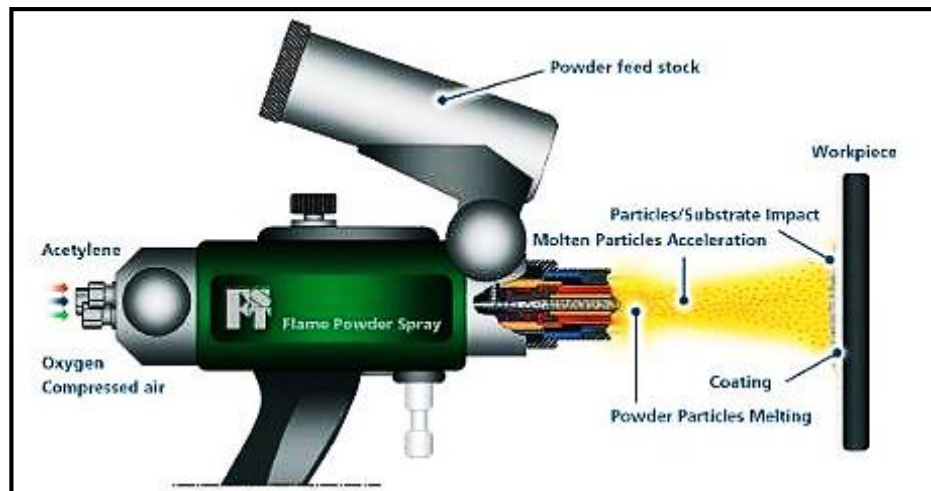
Pictorial view of the thermal spray set-up used for coating alumina
